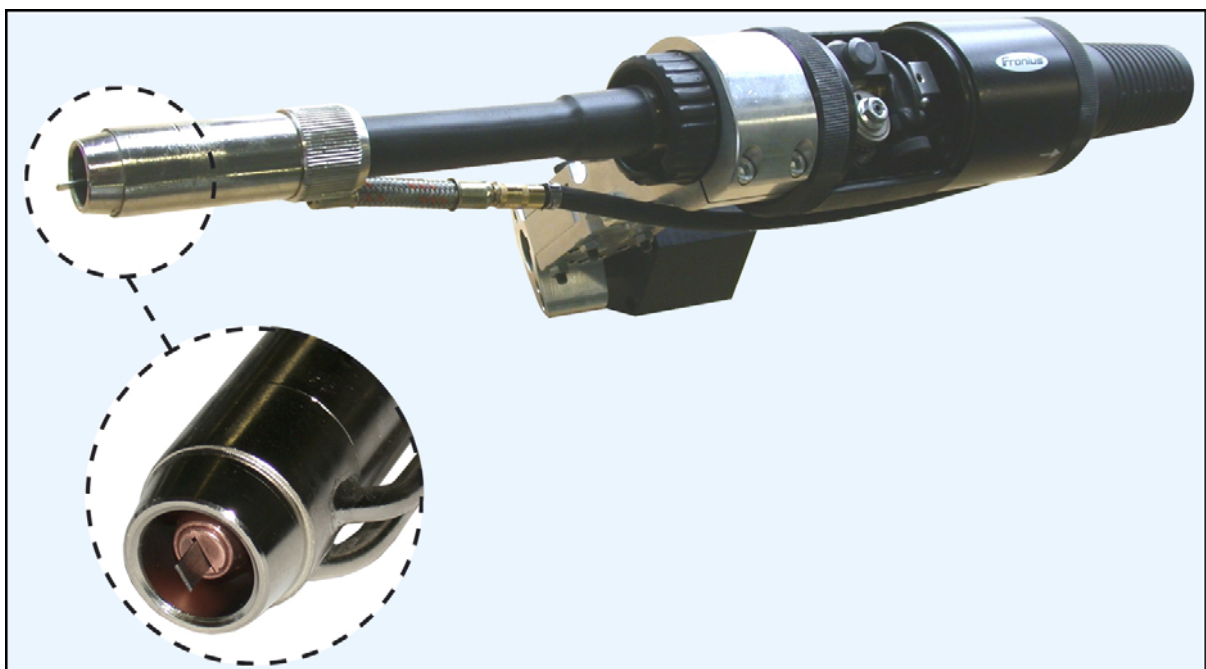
Push-pull strip-wire torch with water-cooled gas nozzle
